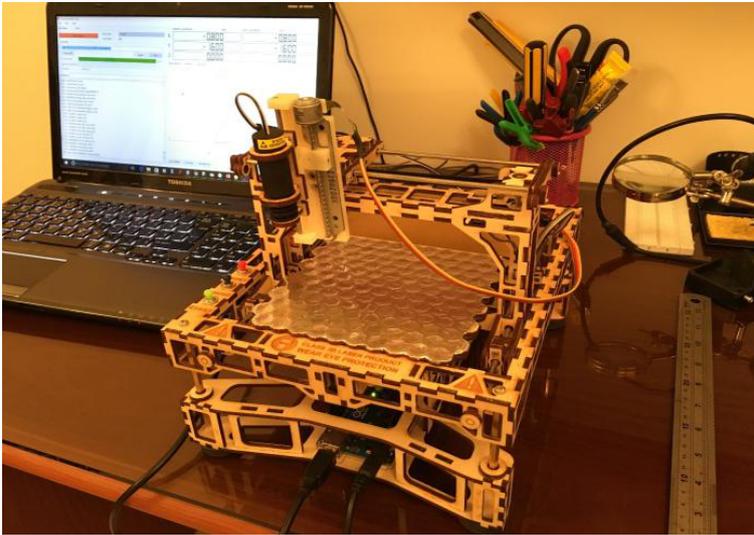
The assembled portable low-cost mini 3-axis CNC laser cutter.
